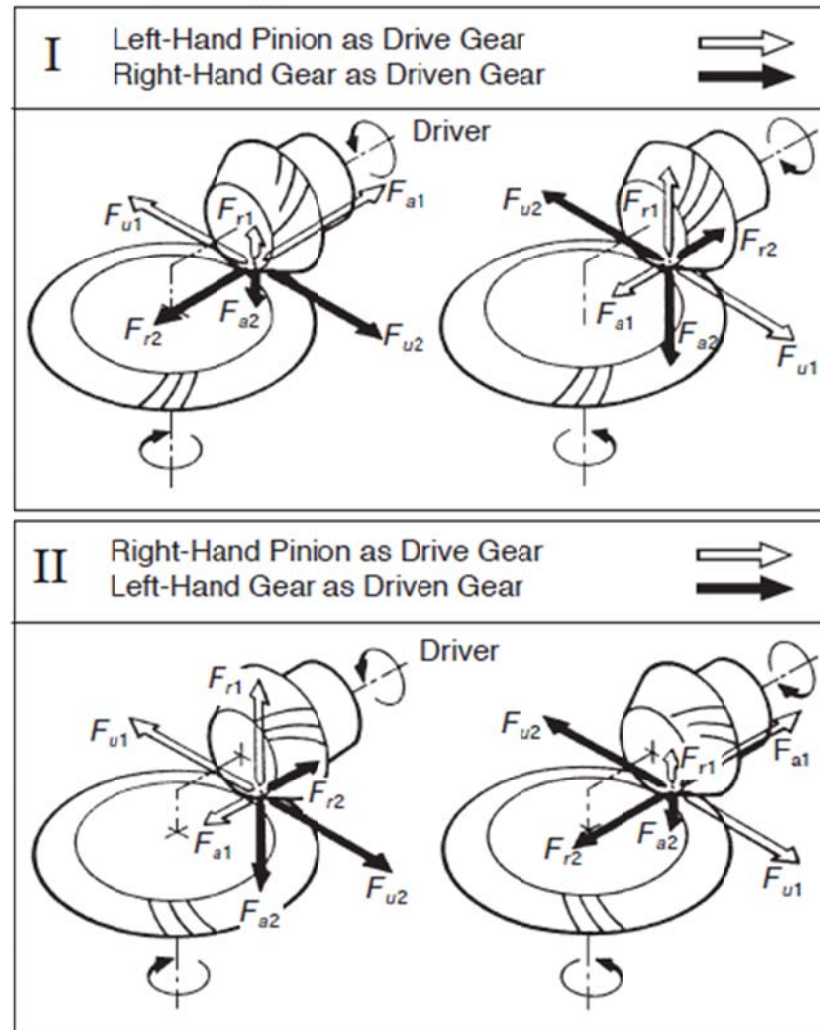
The Direction of Forces Carried by Spiral Bevel Gears (2)
